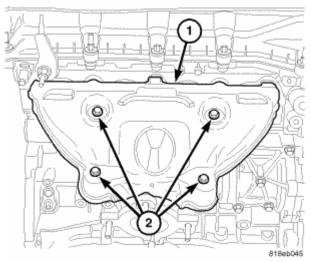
EXHAUST MANIFOLD HEAT SHIELD Courtesy of CHRYSLER LLC
